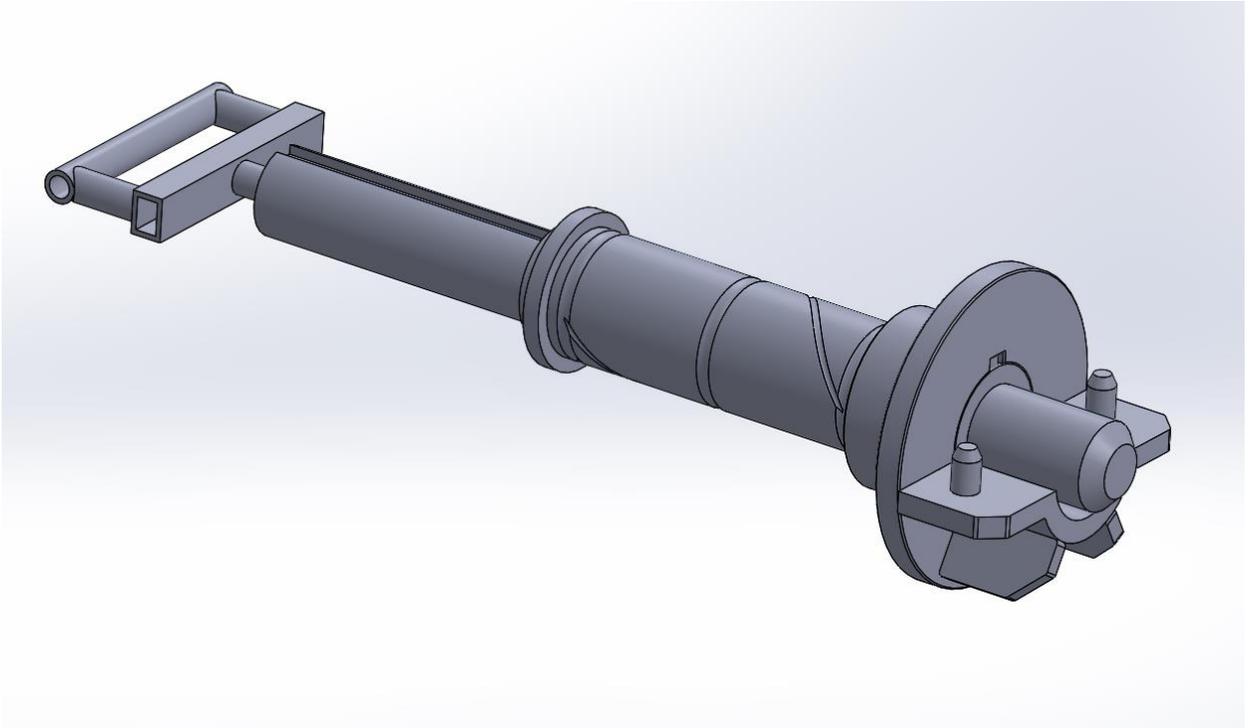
Drive End Iteration #1, Retractable Shaft Assembly
